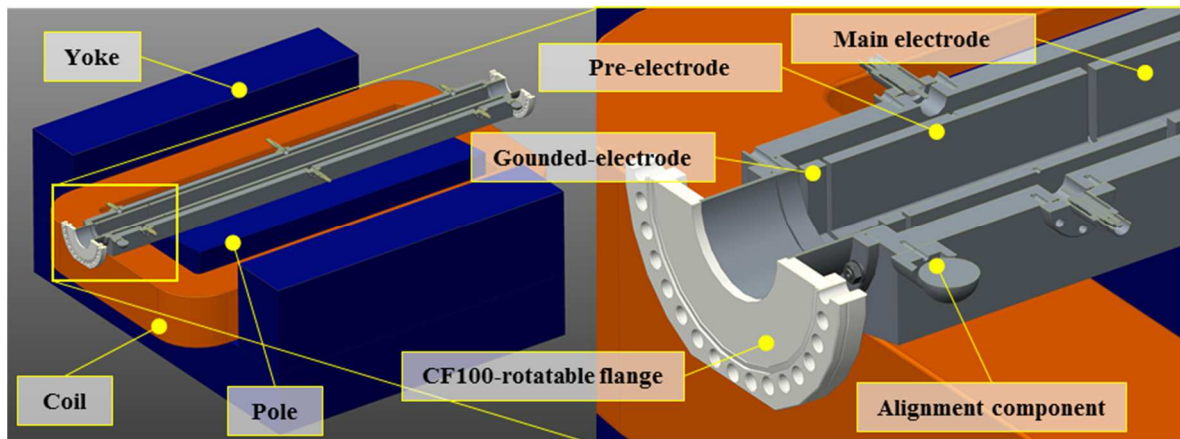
CAD section on the x-z plane of the final assembly.
